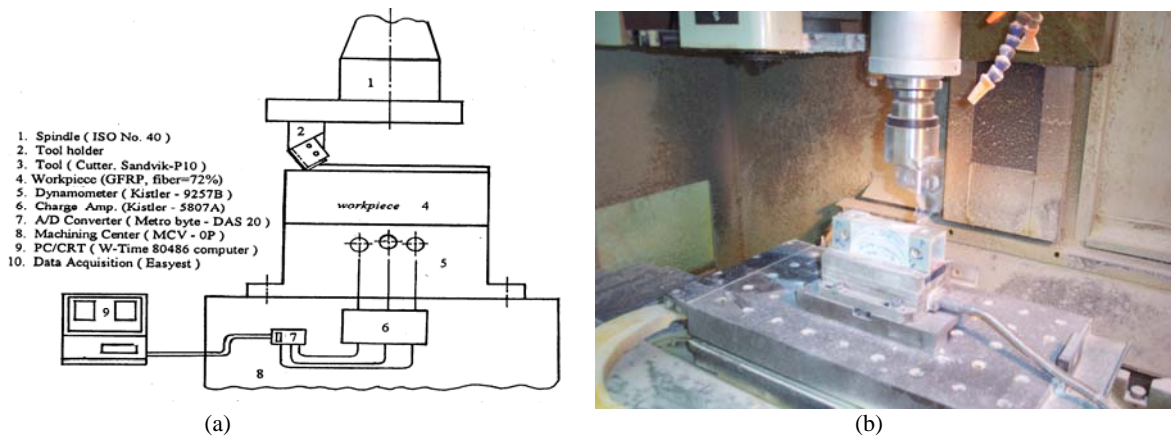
The experimental set-up (a) machining center and dynamometer, (b) tool and GFRP workpiece
